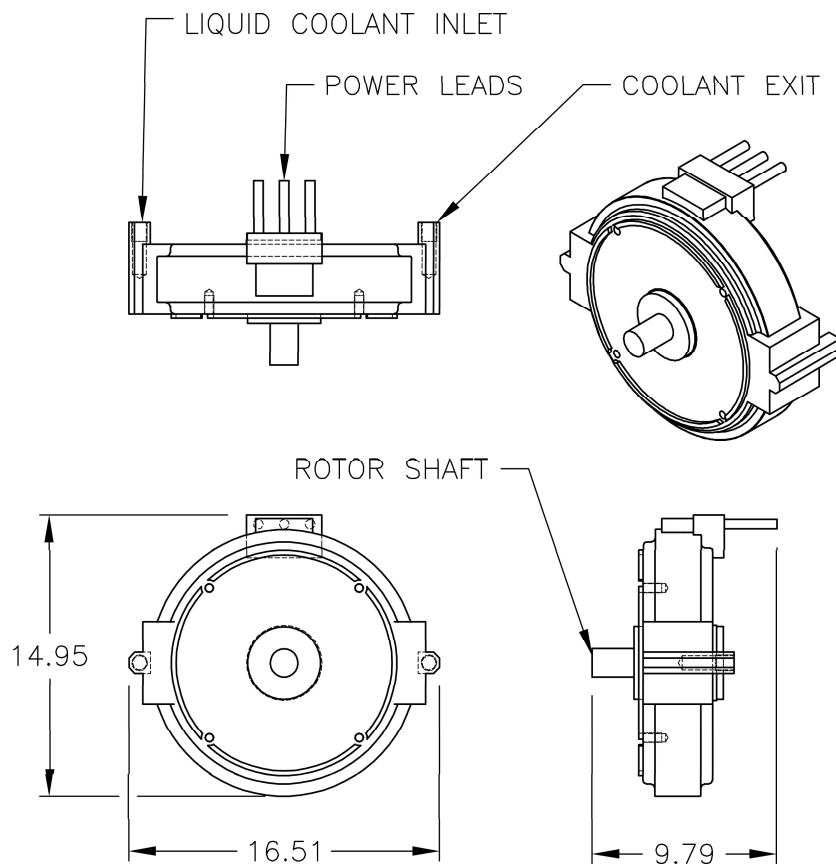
This picture shows the 50kW axial gap motor provided by Dantam Rao of Precision Magnetic Bearings. It is a liquid cooled motor. Torque specs for this motor were unavailable.
